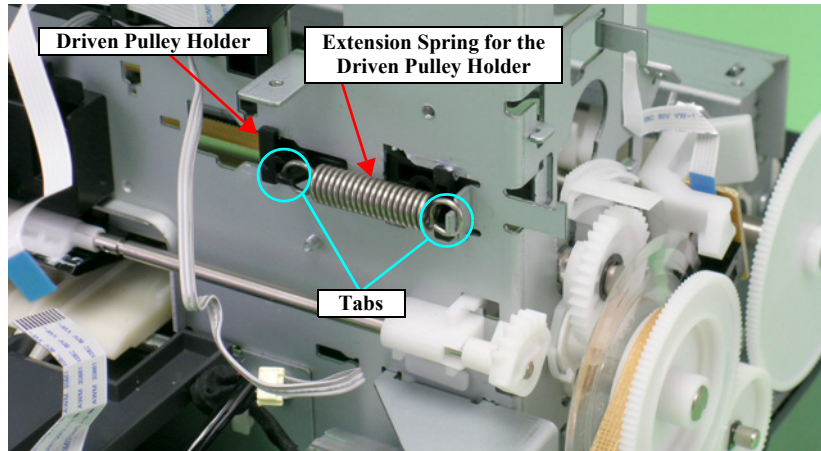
Removing the Extension Spring for the Driven Pulley Holder
